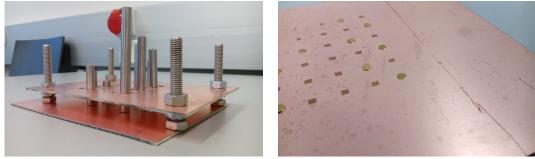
Anisotropic glue test setup, to the left and glued samples on PCB on right hand side.
